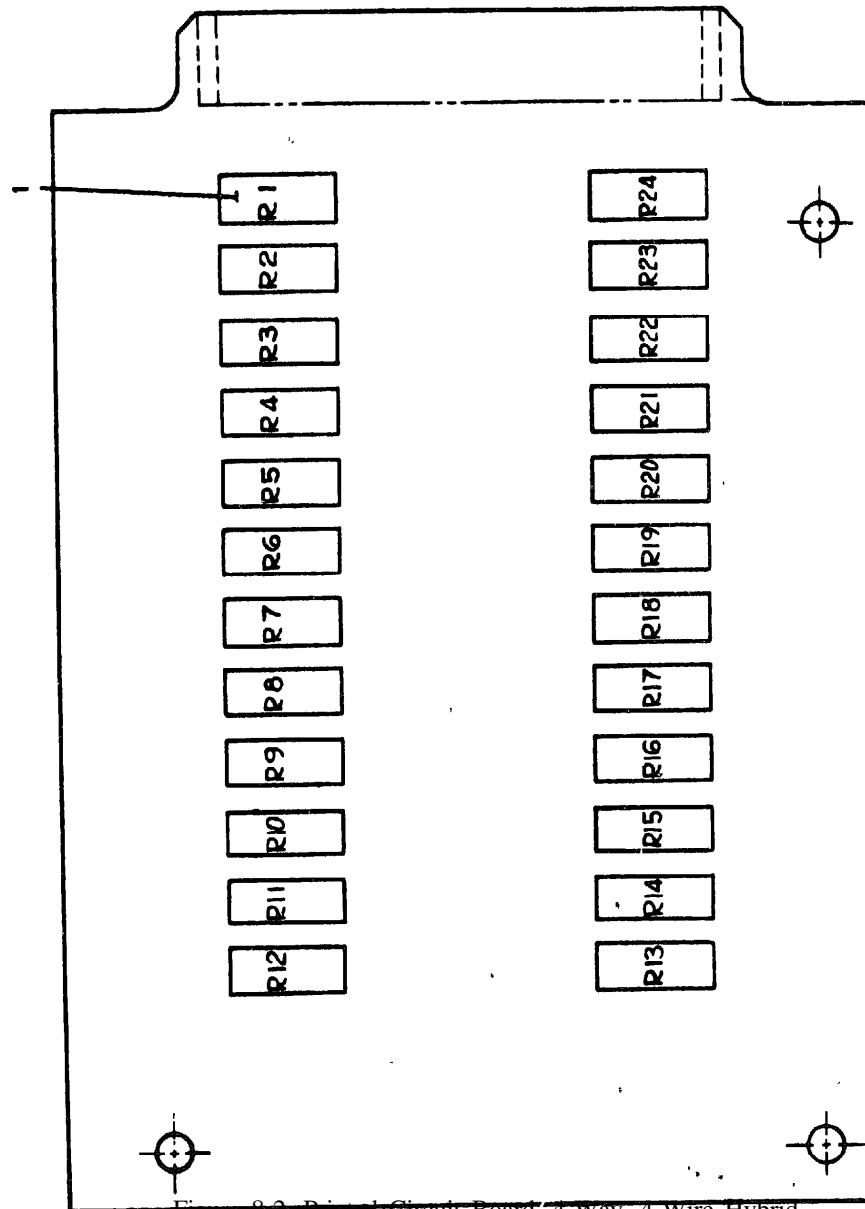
Printed Circuit Board, 4-way, 4-Wire Hybrid
